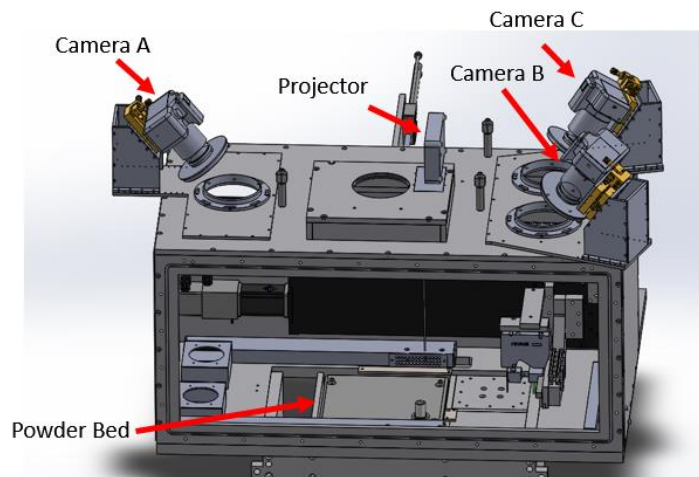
The LPBF machine with the fringe projection system installed for global powder surface measurement.
